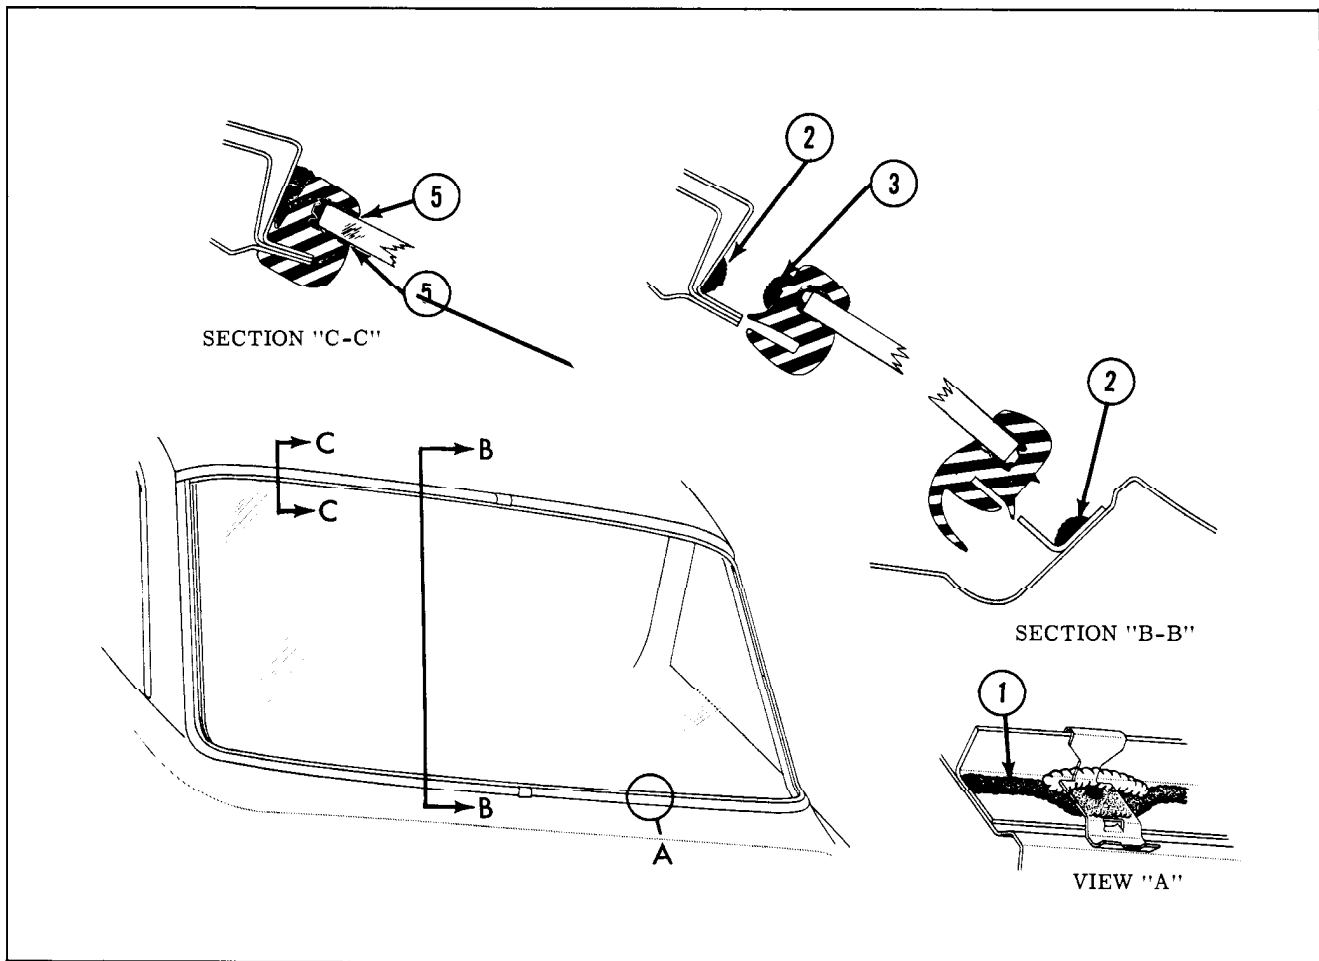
Back Window Sealing (3819-29 and 37 Styles)
